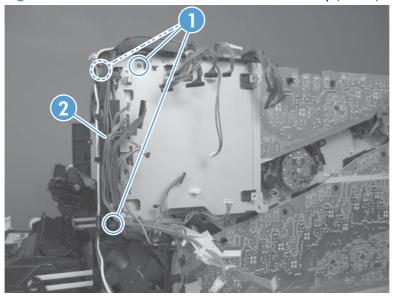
Remove the DC controller PCA and tray (4 of 4)
